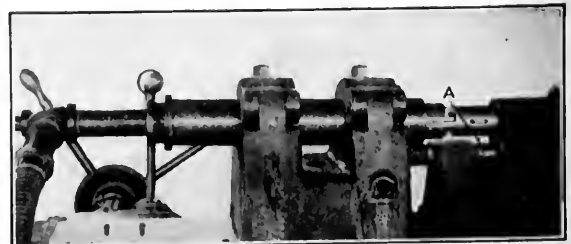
SET-UP FOR FINISH-REAMING THE LARGE HOLE
